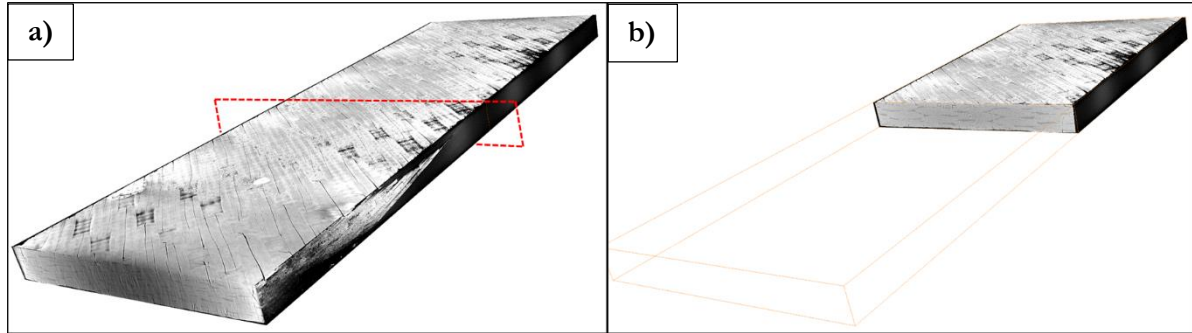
46 : Damaged specimen  $\mu$ CT scan a) Whole specimen b) Cut specimen.
